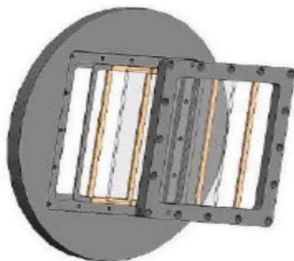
Intermediate steel circular fixture for square test specimens.
